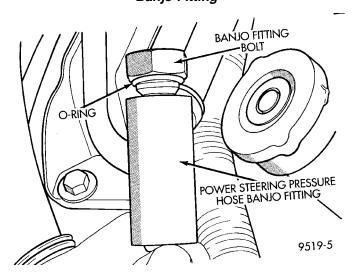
O-ring Installed On Banjo Fitting Bolt
